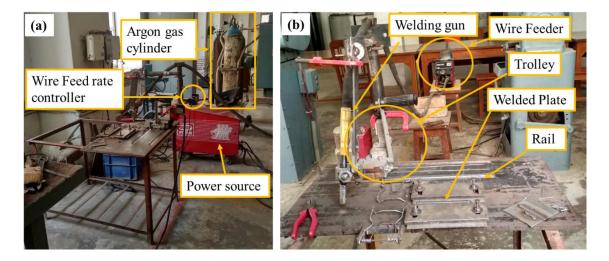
GMAW machine setup along with its components: (a) shielding gas cylinder, wire feed rate controller, power source, and (b) welding gun, wire feeder, welding trolley, welding rail, welded plate.
